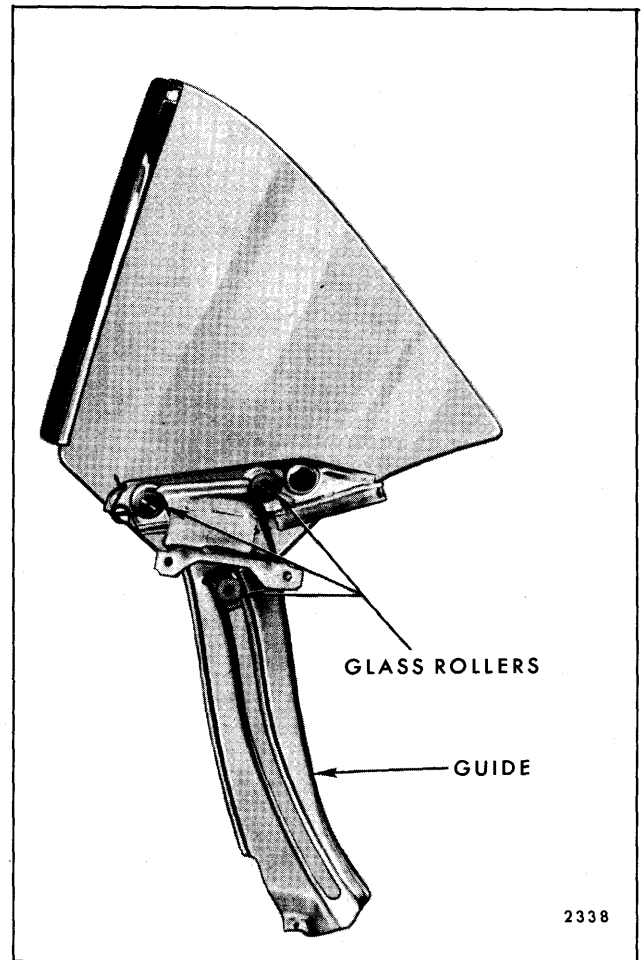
Rear Quarter Window and Guide Assembly - "F" Styles
